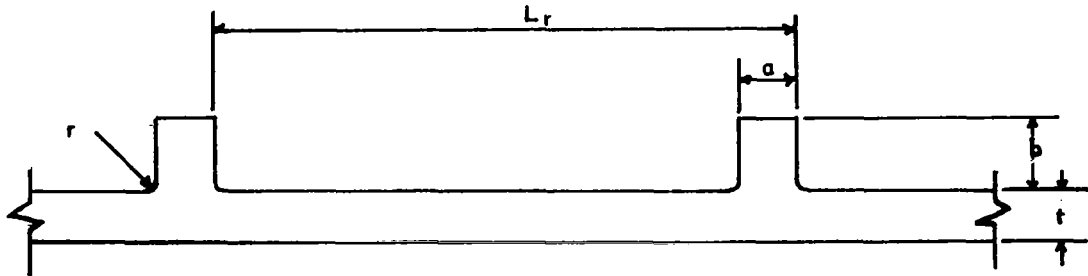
LONGITUDINAL CROSS SECTION OF CYLINDER WALL
